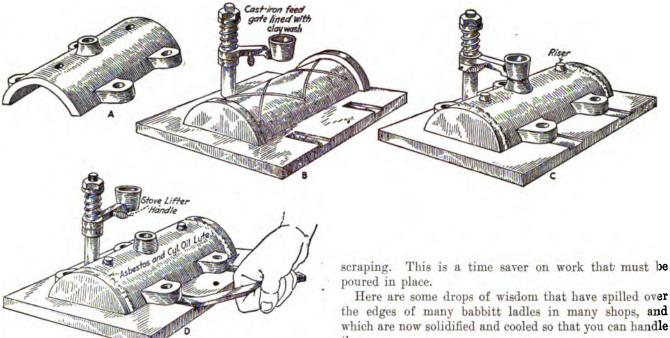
MANDREL AND METHOD OF POURING HALF BOXES
